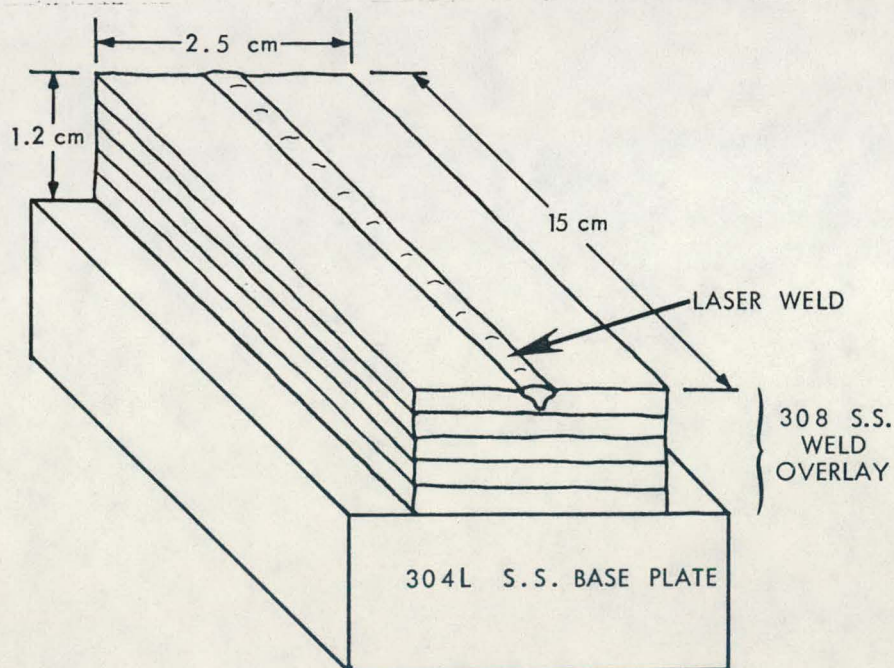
Schematic of the weld pad used for the laser weld experiment.
